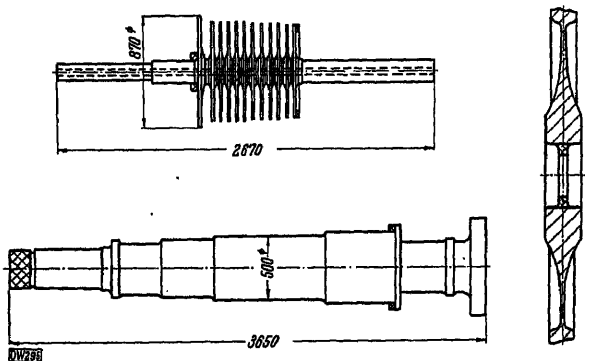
Arrangement of test pieces on rotors, shafts and discs (dimensions in mm.)
